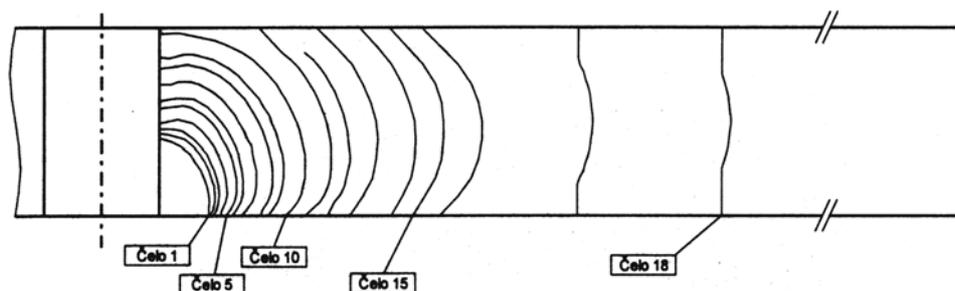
The geometry of fatigue crack tips from fractographic analyses [4].
